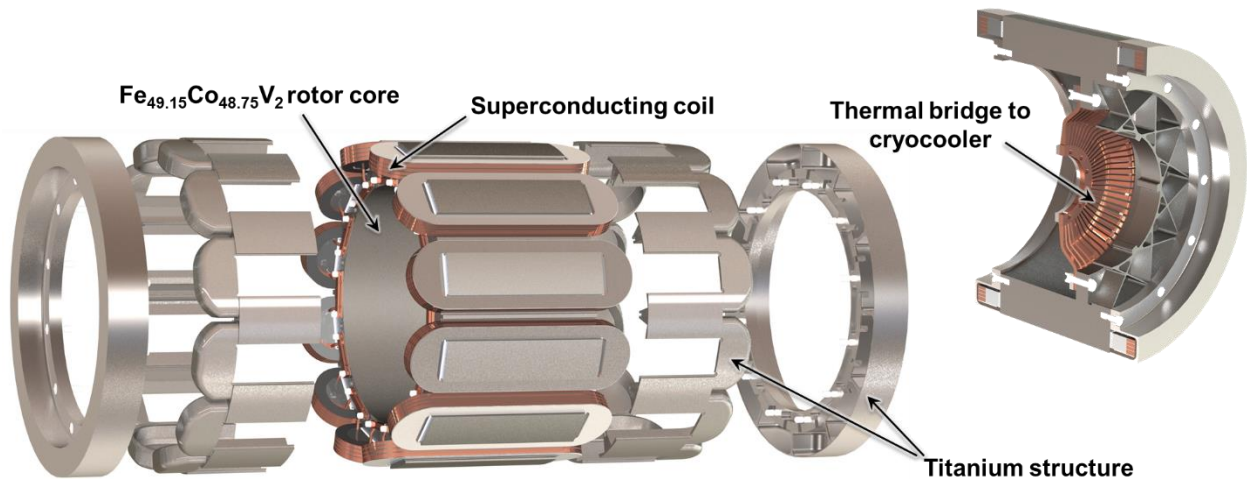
Exploded and section views of HEMM's superconducting rotor.
